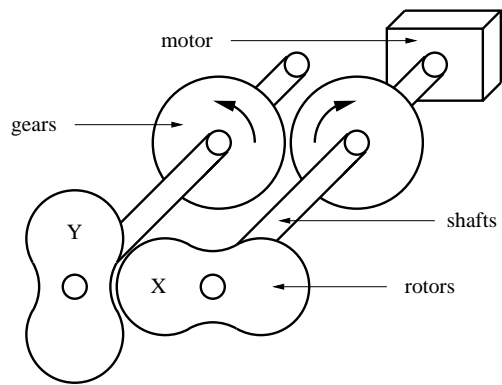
Schematic diagram of the moving parts of a Roots blower vacuum pump, illustrating the parallel arrangement of rotors, shafts and gears.
